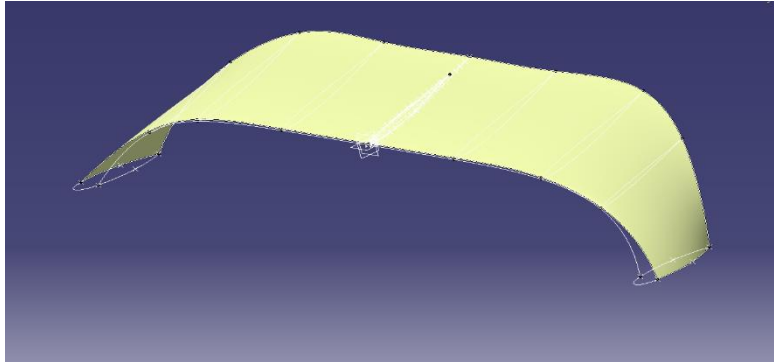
Design of the top surface of the spoiler using Surface technique
